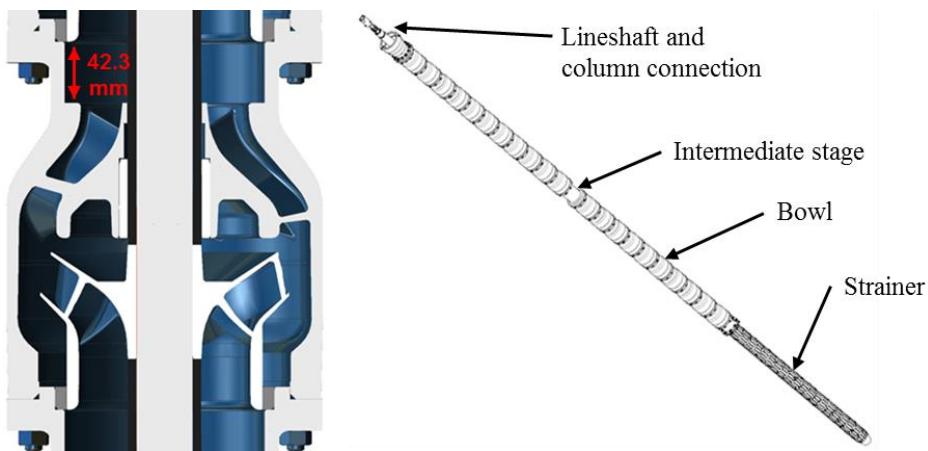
Cross section of one GTV pump stage and drawing of the GTV pump assembly with 21 stages
